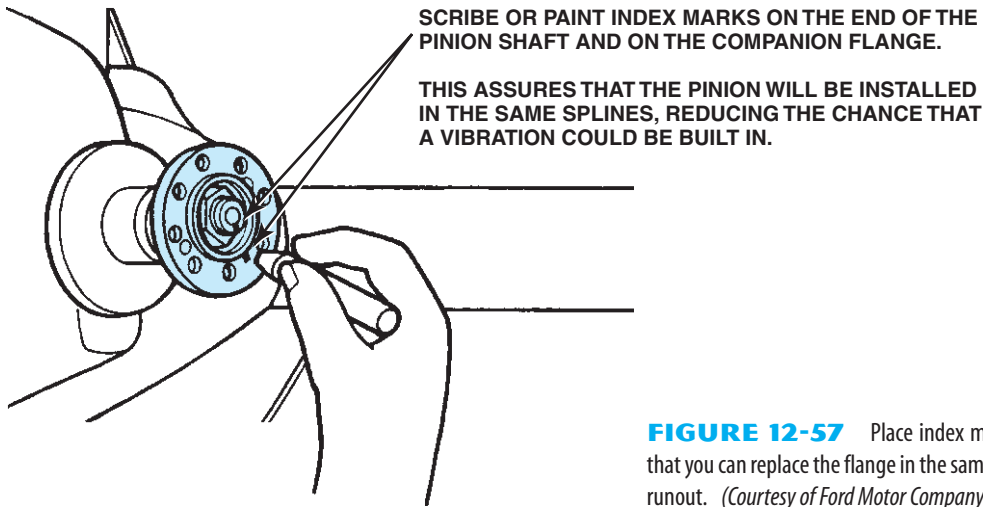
Place index marks on the drive pinion shaft and flange so that you can replace the flange in the same position and reduce the possibility of flange runout. (Courtesy of Ford Motor Company)
